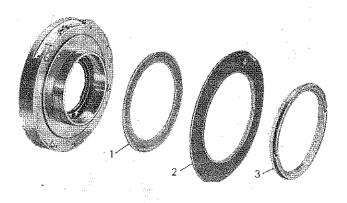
Parts on Shutter Mechanism Plate, Partially Exploded (II) Index
